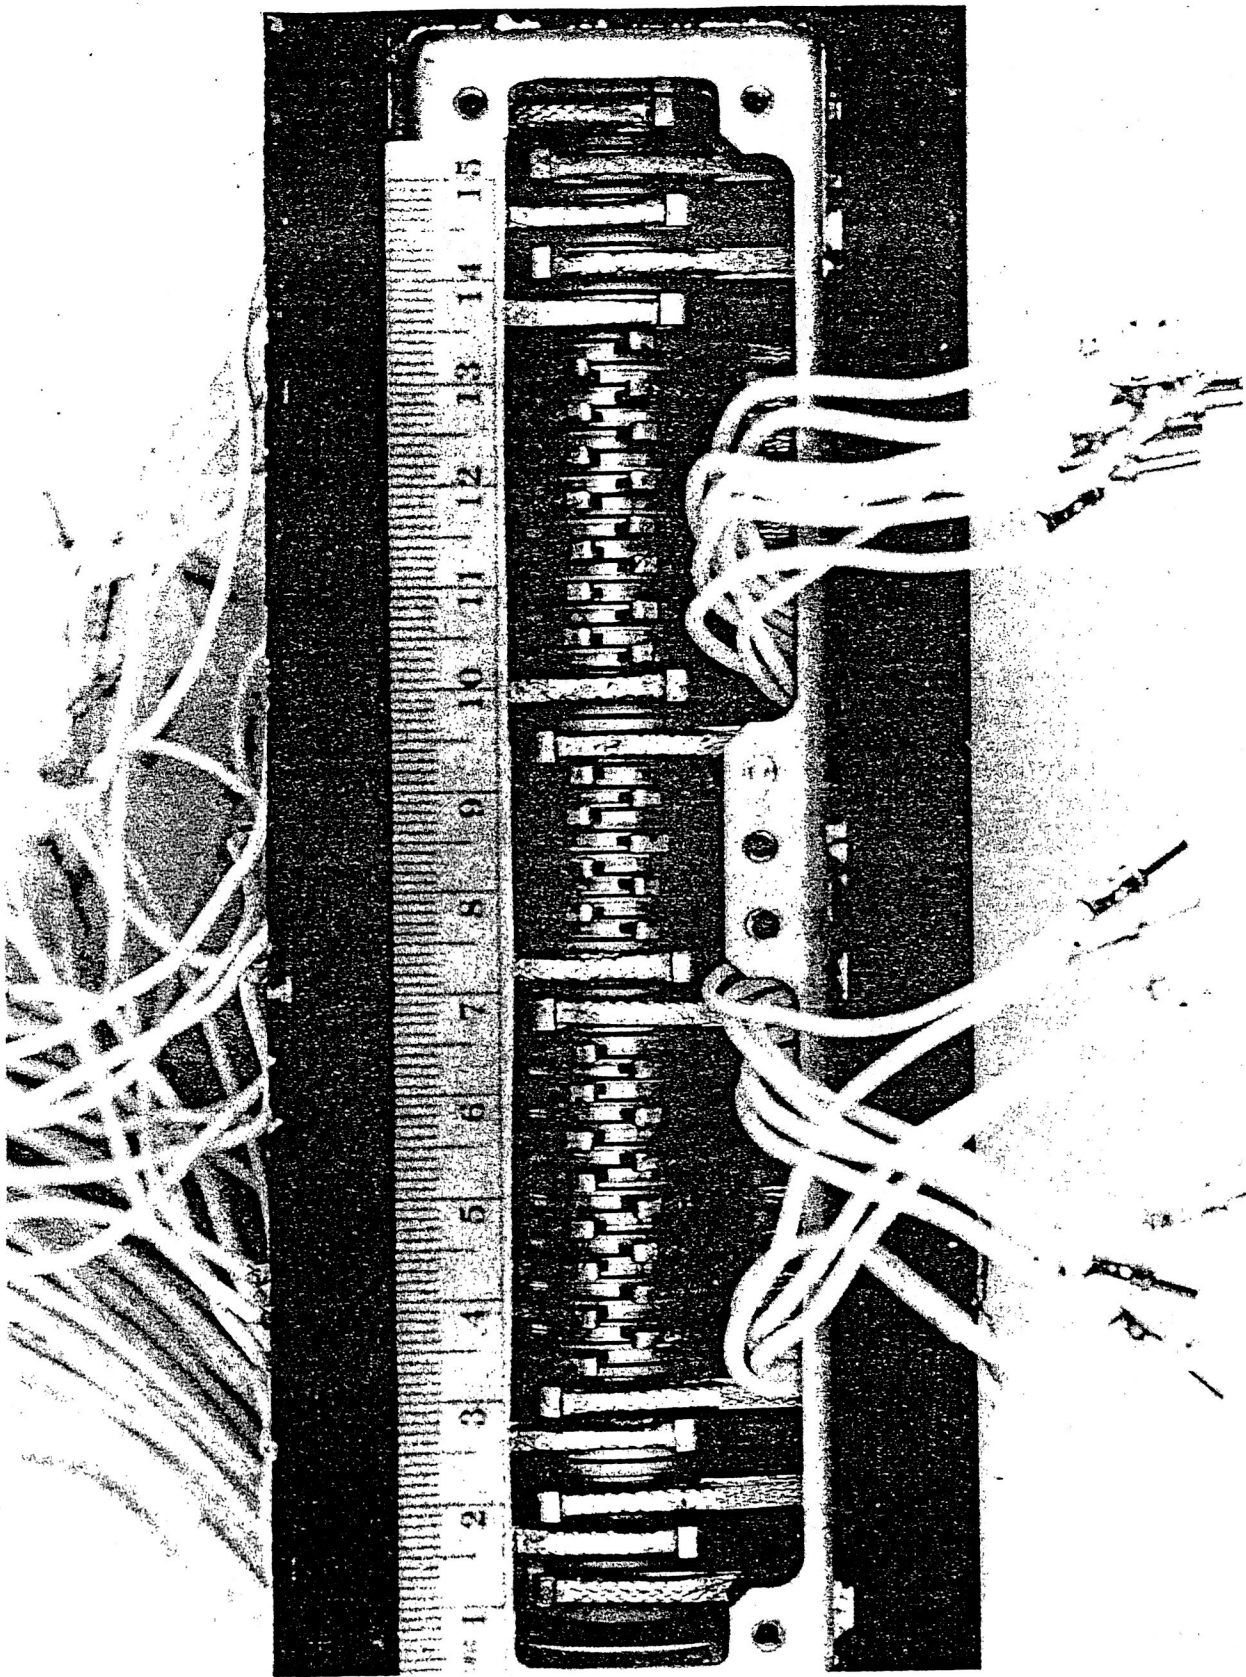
Assembled Slip Ring Assembly (Side Cover Removed for Viewing)
